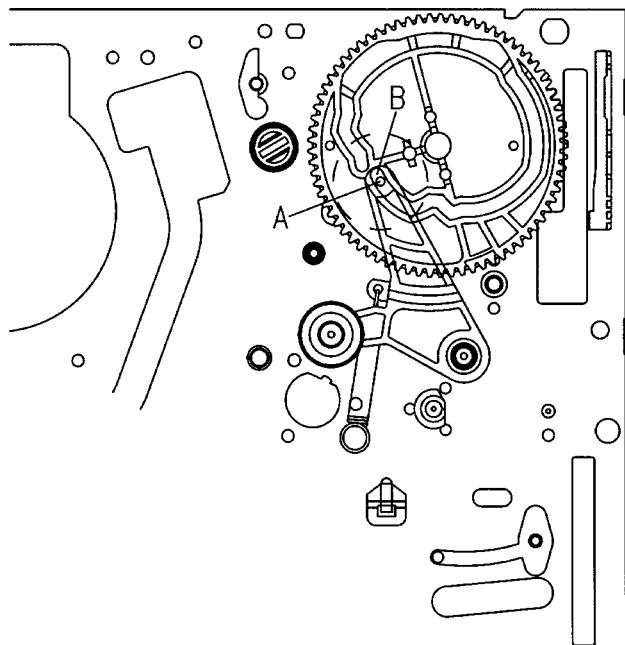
Mechanical Checks/Pinch Lever and Cam Gear Alignment
